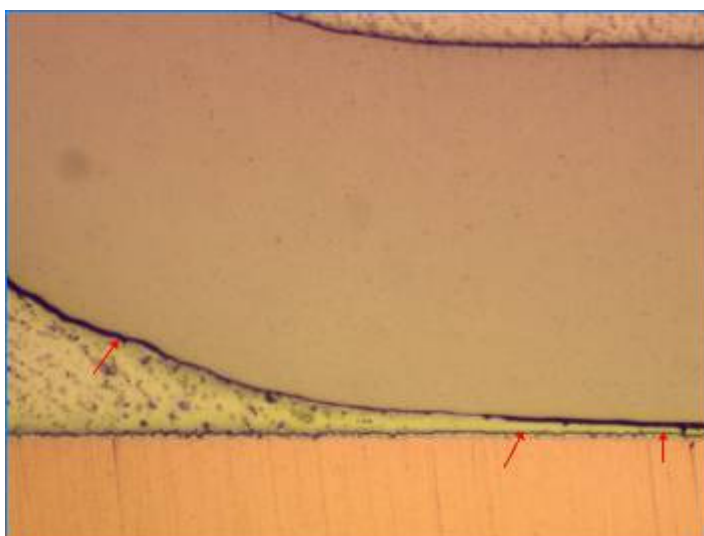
cross section, SN68, U29, right lead solder crack, between lead and pad,400x
